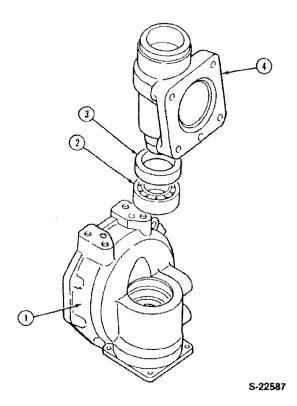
Gear Reduction Drop Box Disassembly 1. Bevel Gear Case
